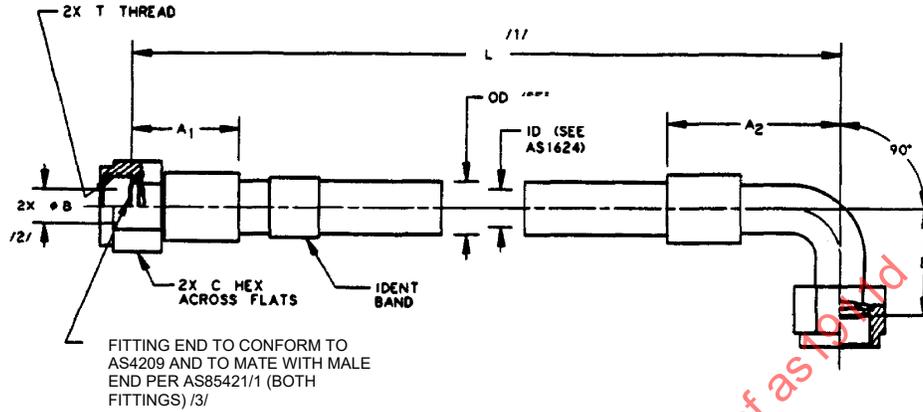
HOSE AND FITTING DIMENSIONS
